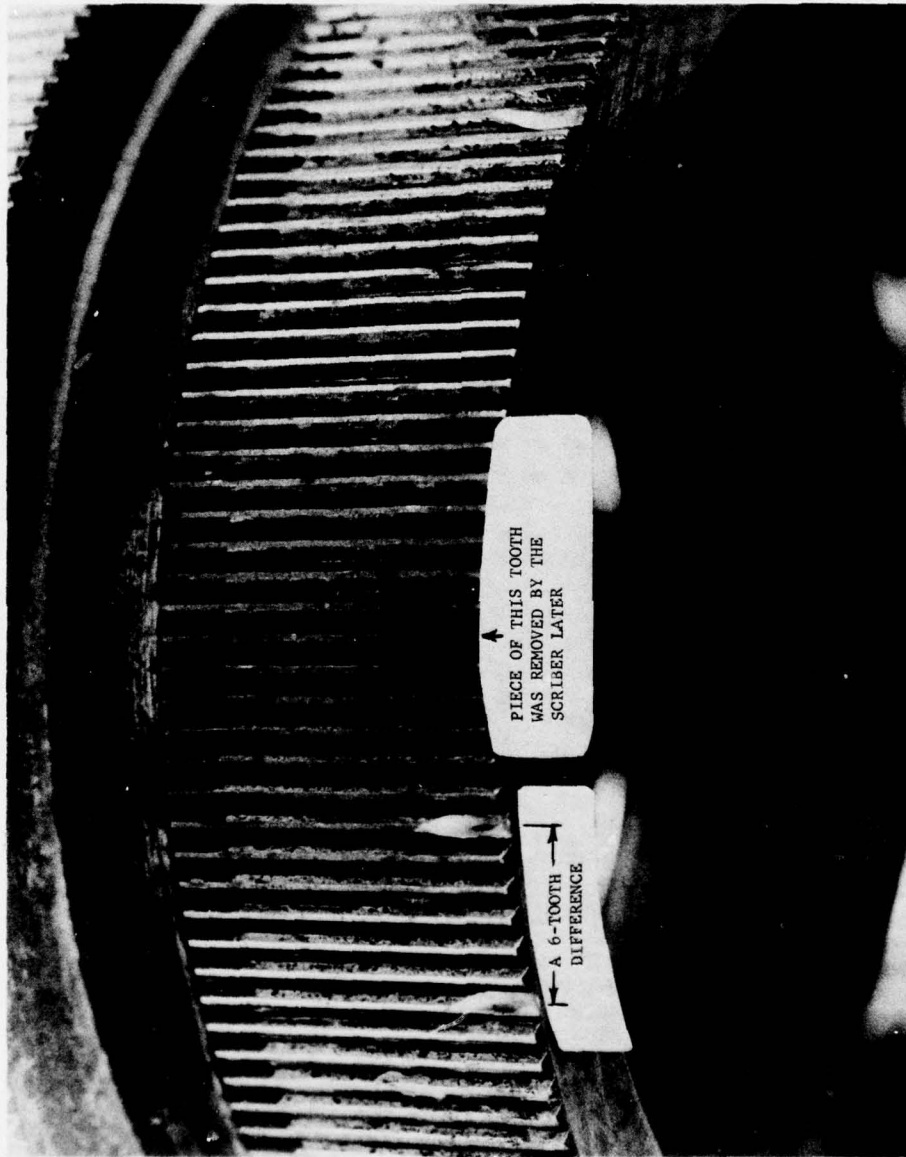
Ring Gear Teeth Damage After Run No. 6 (Lower Gear)
